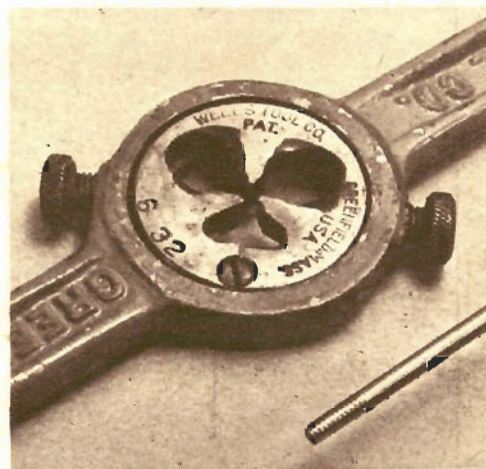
The dia. of CB whip 24 in. from top is 0.138 in.—the dia. of 6-32 screw. Thread whip end using 6-32 die which is shown above in stock.
